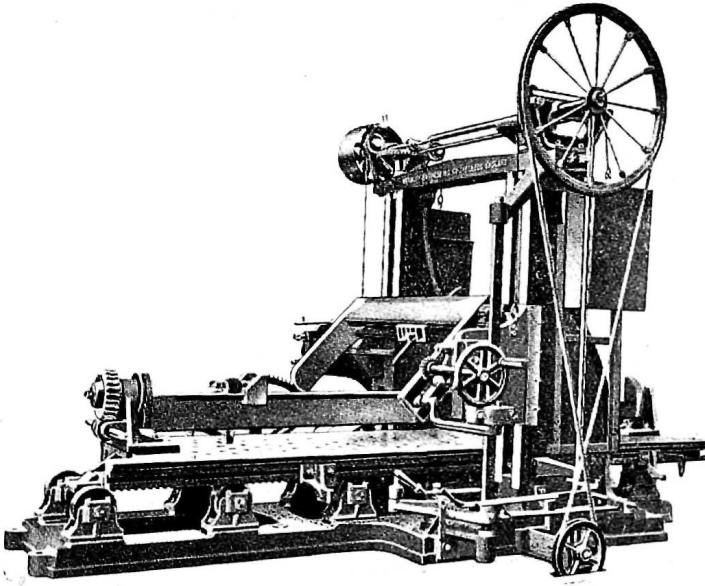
PLANING- AND MOULDING-MACHINE.
